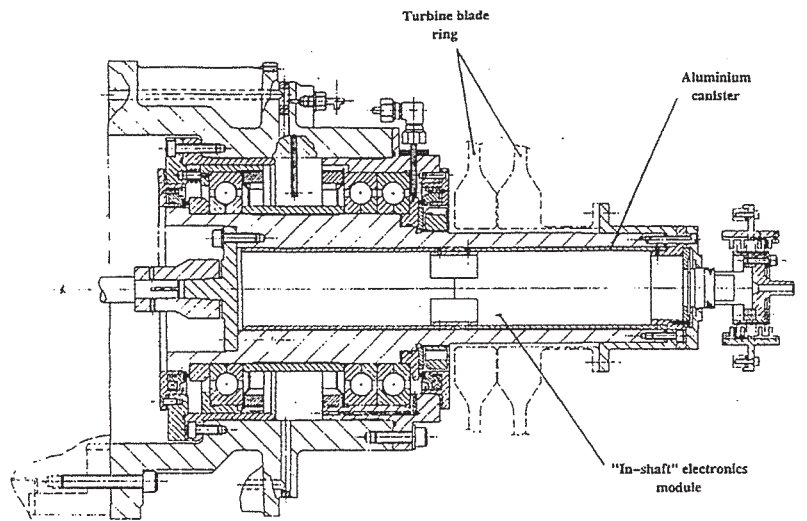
Schematic of the Oxford Rotor Showing the Position of the "In-shaft" Electronics Module
